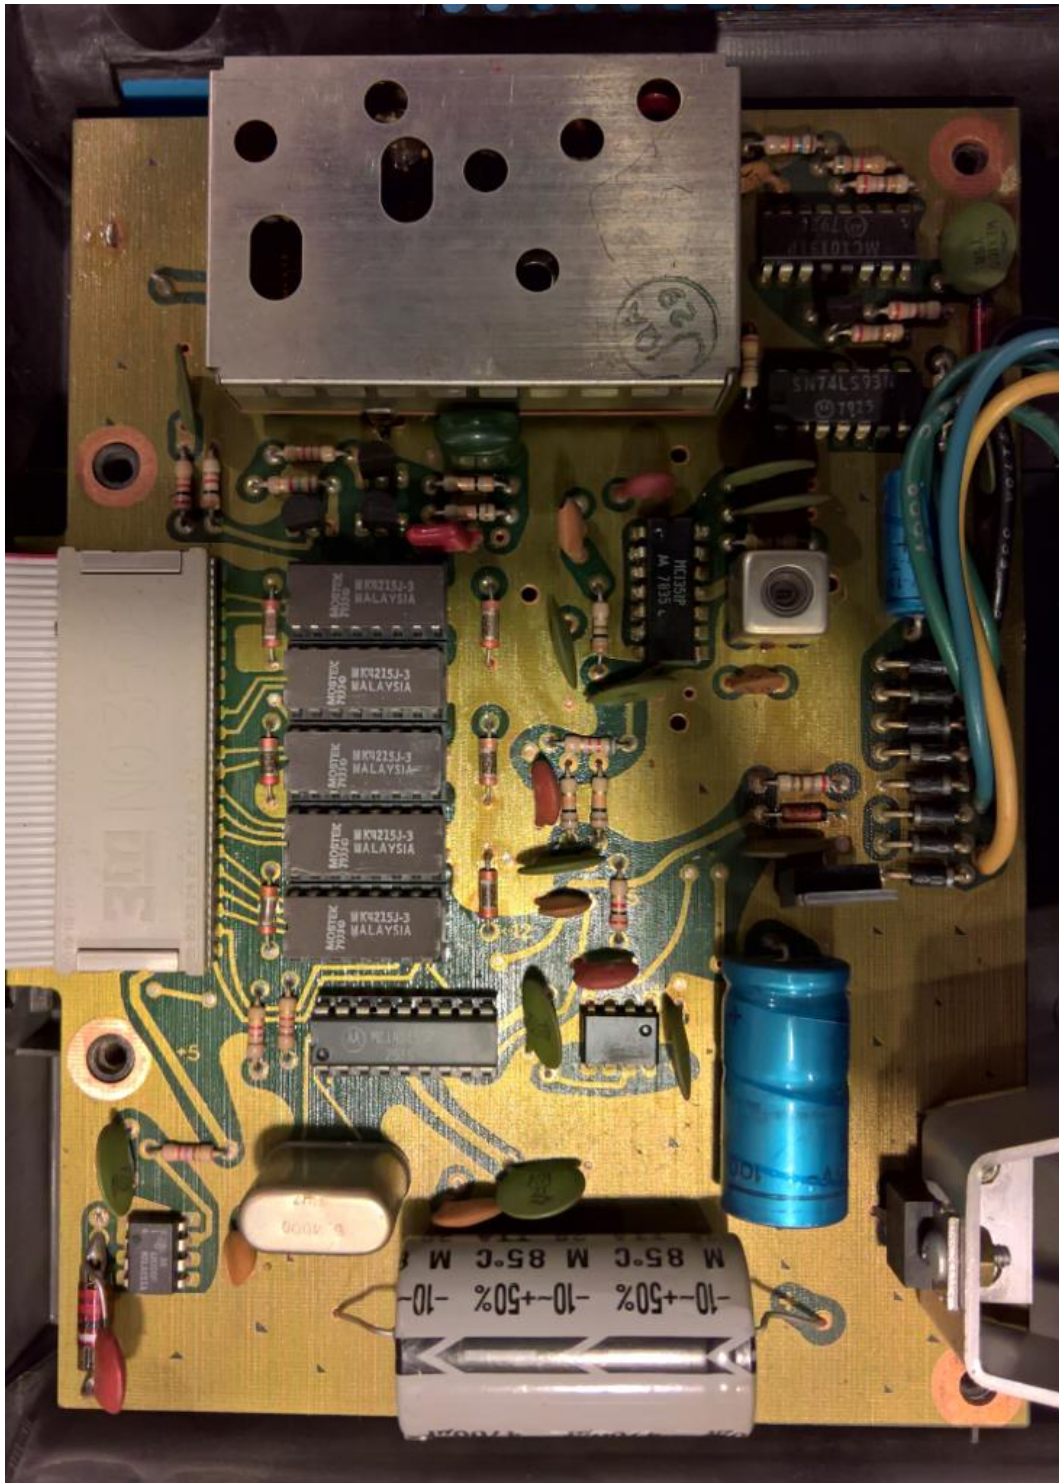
Jerrold PlayCable Lower PCB Component Side
